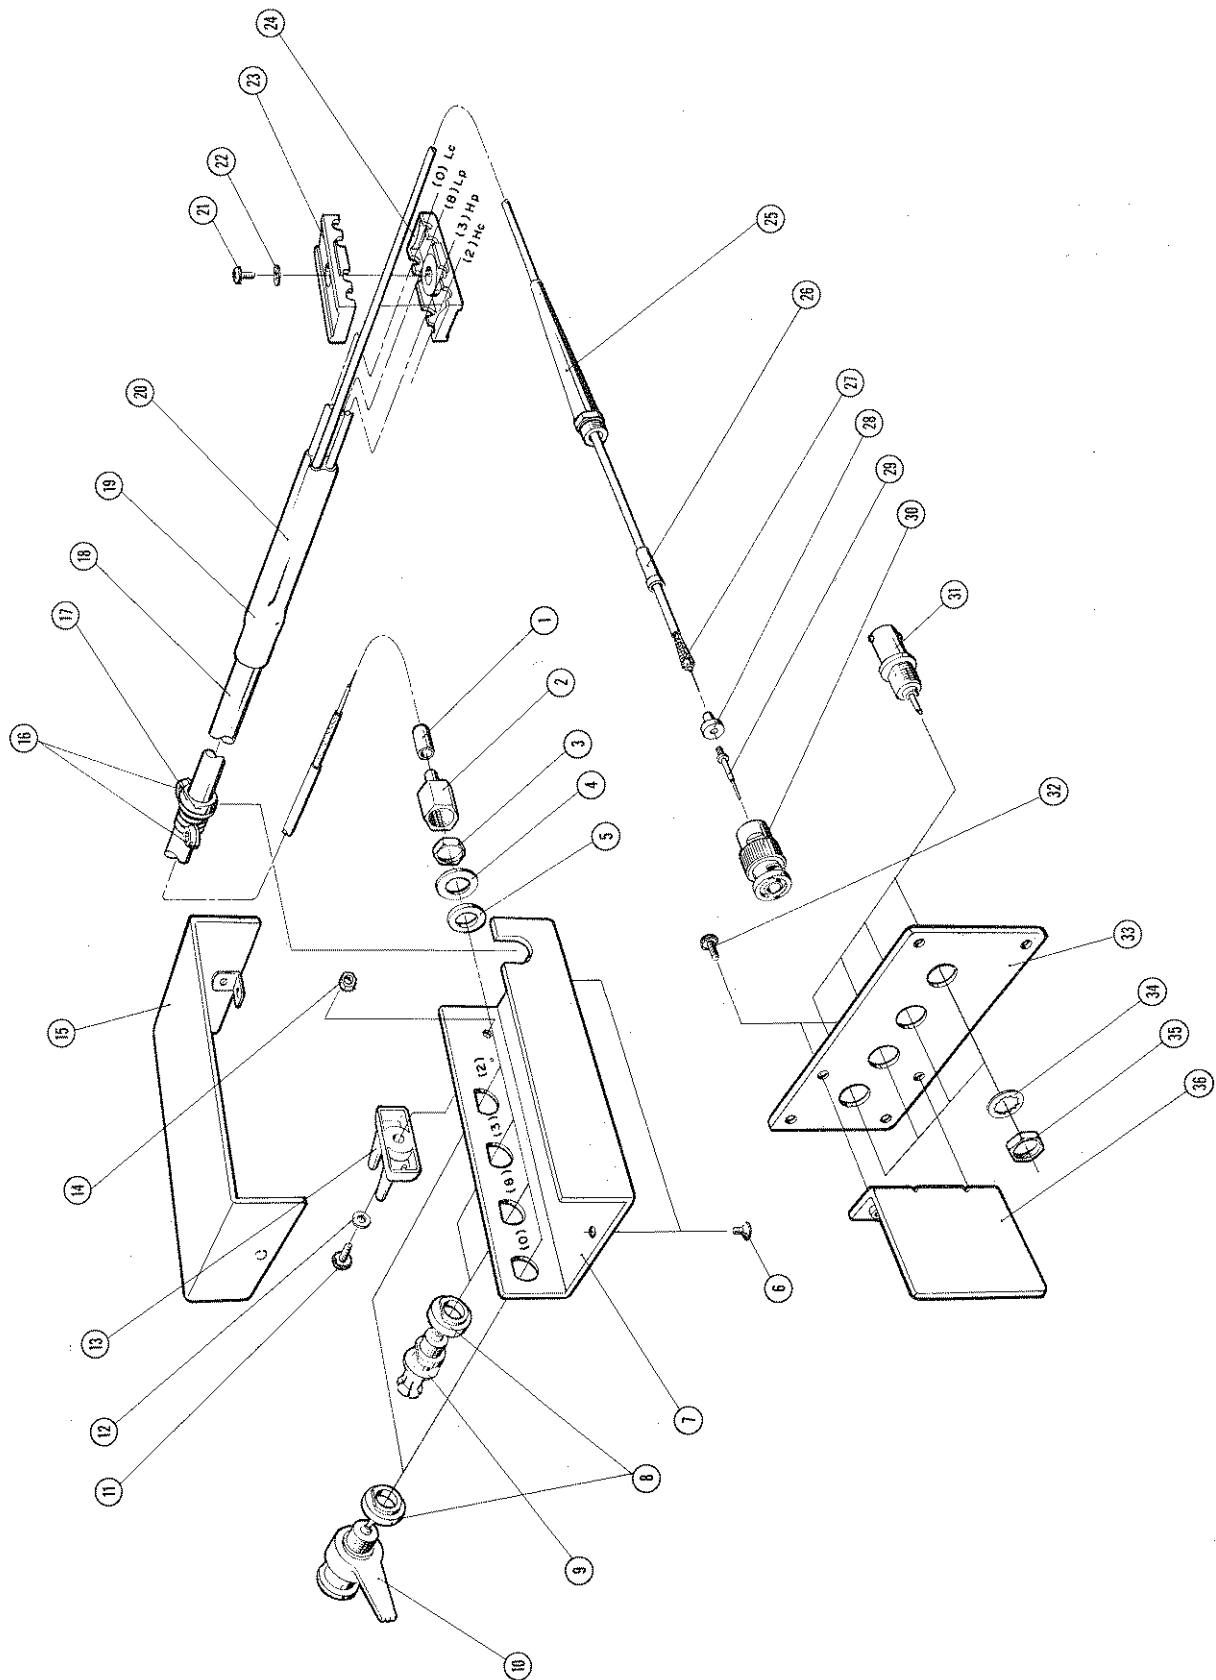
Parts Identification for 16048A (Sheet 1 of 2).
